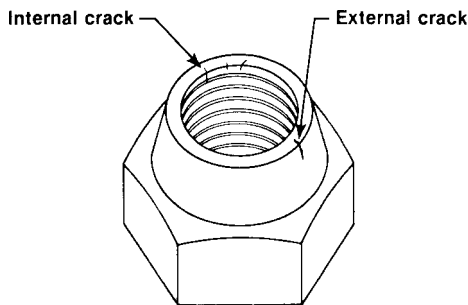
Typical Locking Element Cracks in Prevailing-Torque Nuts
